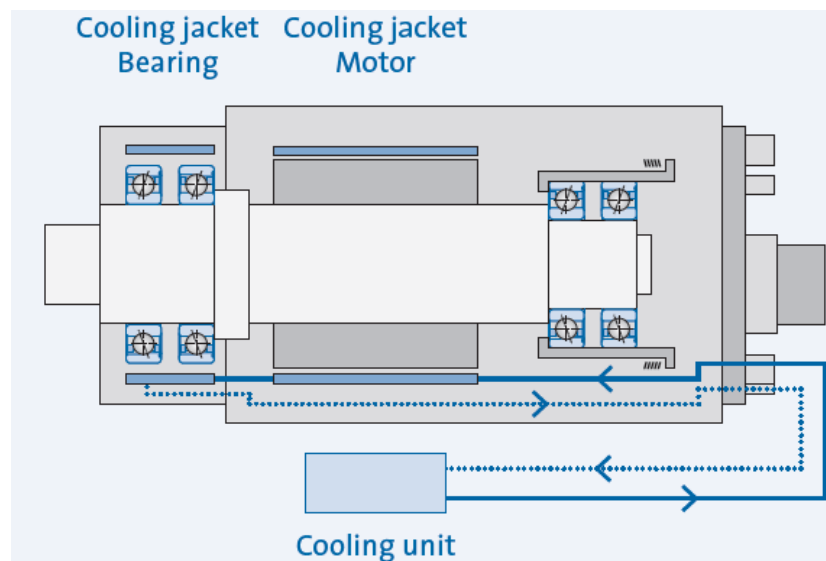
External Cooling unit for spindle motor and bearings [Courtesy GMN]
